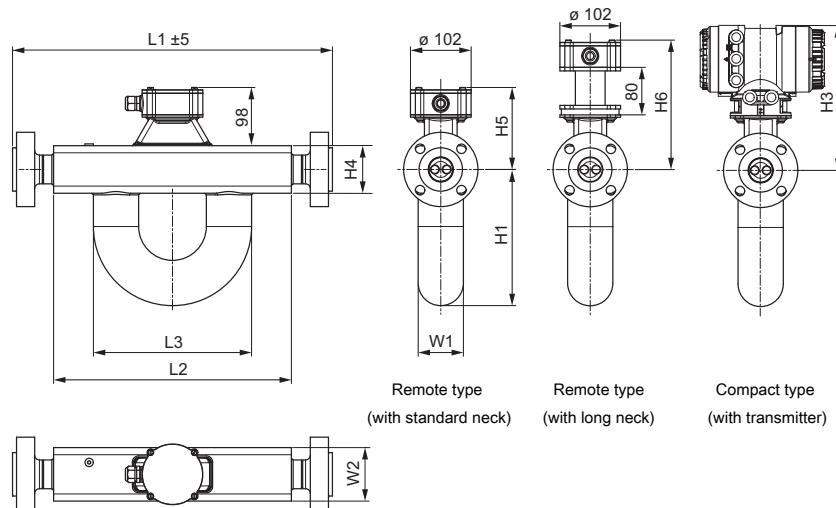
Dimensions for meter sizes FCS600 DN15, DN25 and DN40
